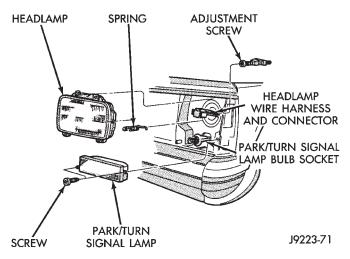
Headlamp & Park/Turn Signal Lamp Removal/ Installation
